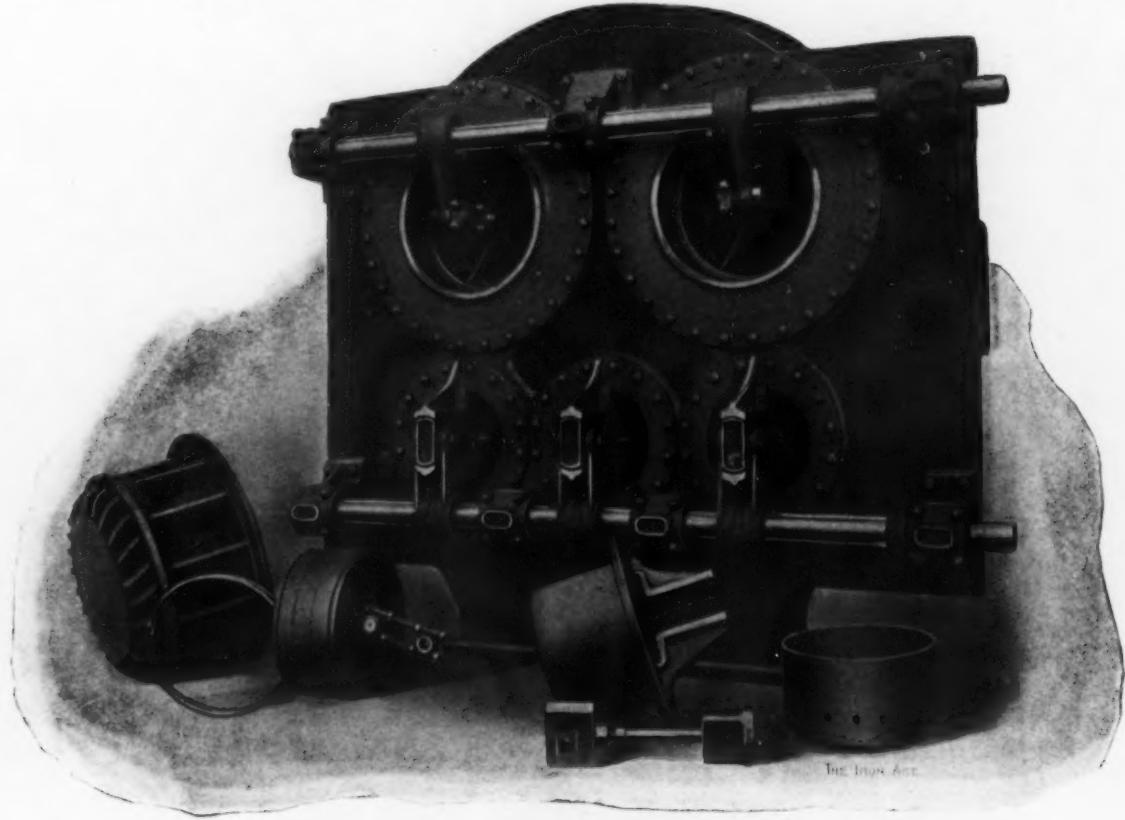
The Head of the Air Cylinder and Parts of the Inlet and Outlet Valves.
